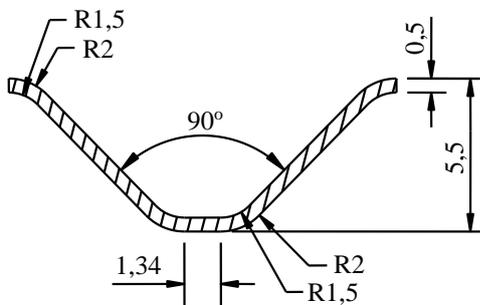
Dimension of trapezoid ribbed of heat exchanger plate.
